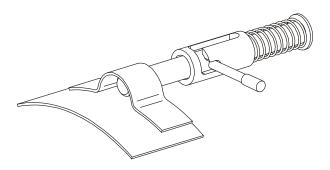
DEAD BOLT TYPE STEERING LOCK ENGAGED
